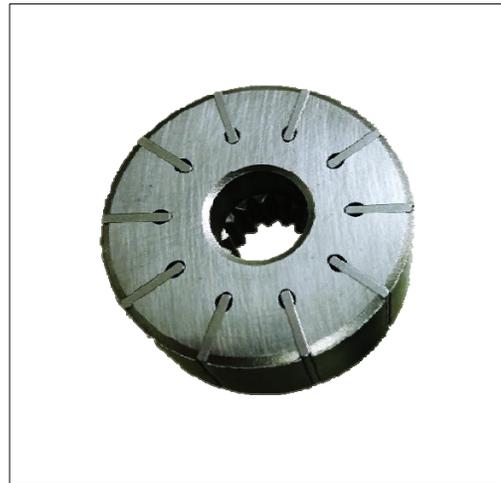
Photograph of a 36-mm diameter pump impeller component.
